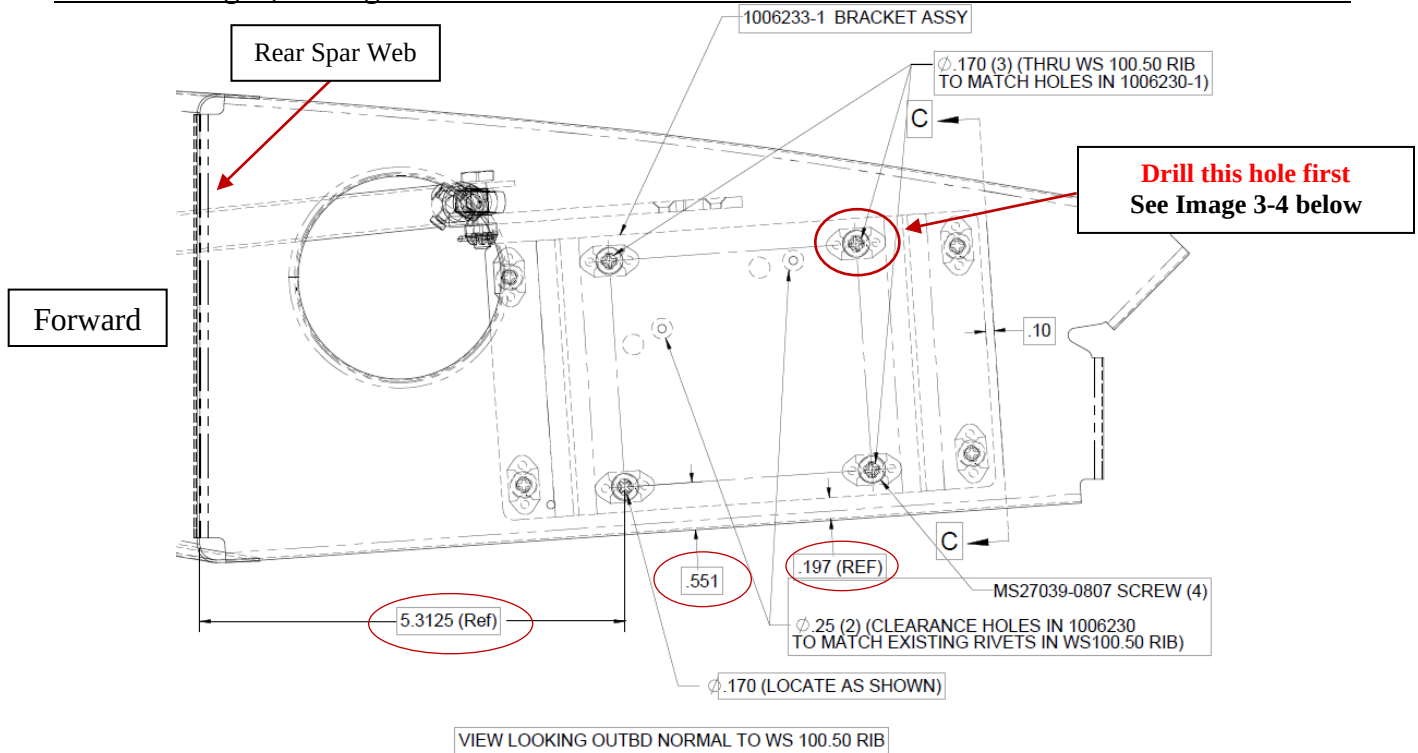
ROLL SERVO & MOUNTING PLATE INSTALLATION
